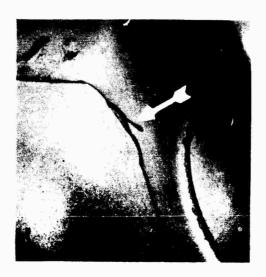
Arrow Denotes 1-Inch Crack In Left Rear Suspension-Arm Assembly In the Spring Seat On M718 after 8307 Test Miles.
